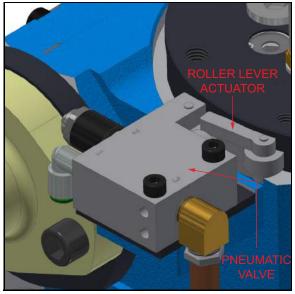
PNEUMATIC VALVE LOCATION
